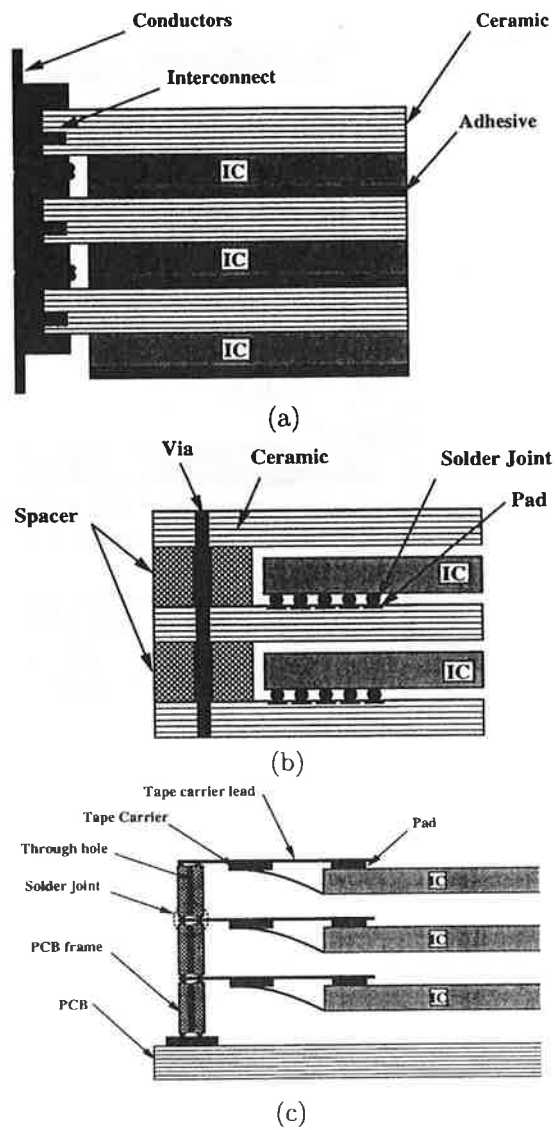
Three variants of the solder edge conductors vertical interconnections. (a) Solder edge contacts. (b) Solder filled via. (c) Stacked PCB leadframes.
